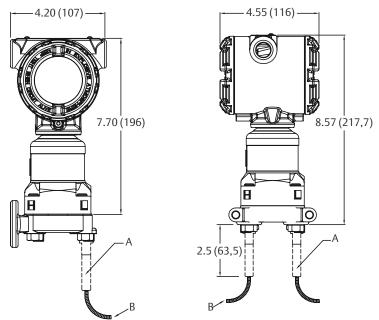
Rosemount 1199 Remote Seal System Assembly with Rosemount 3051S Scalable Transmitter
